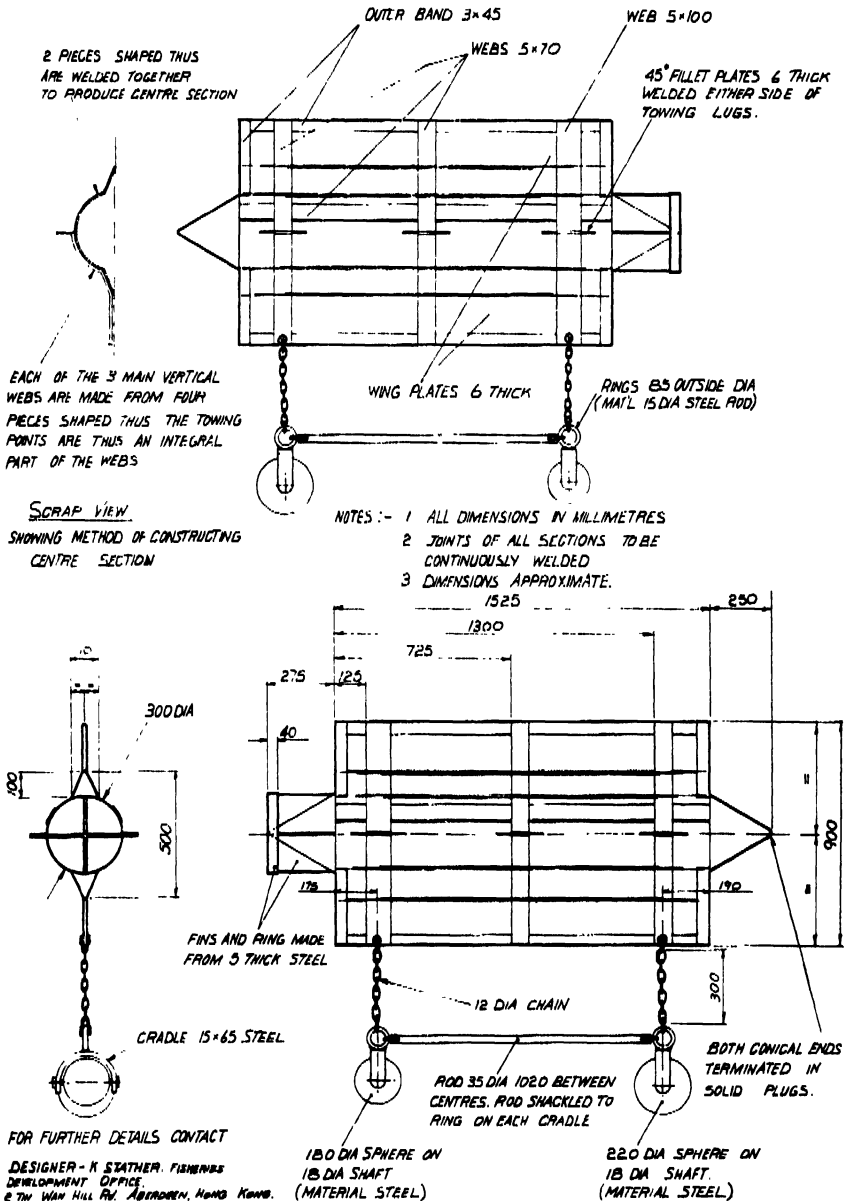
Construction drawing of a rectangular otter board, special design (diverting depressor), of about 1.4 m<sup>2</sup>.
